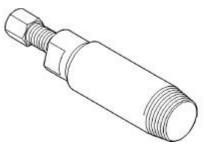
Front Crankshaft Seal Remover 6341A Courtesy of CHRYSLER LLC
